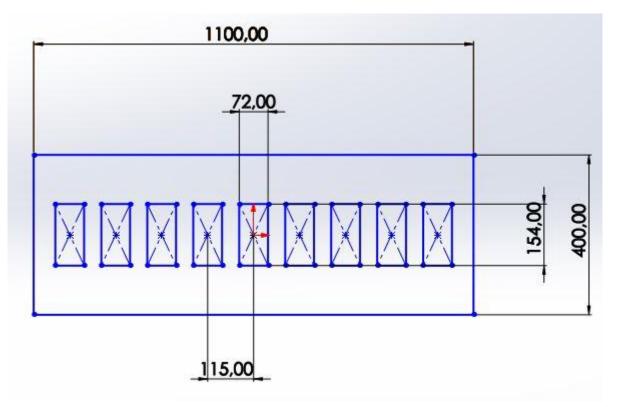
POSITIONING ON THE PRESS MACHINE TOOL
